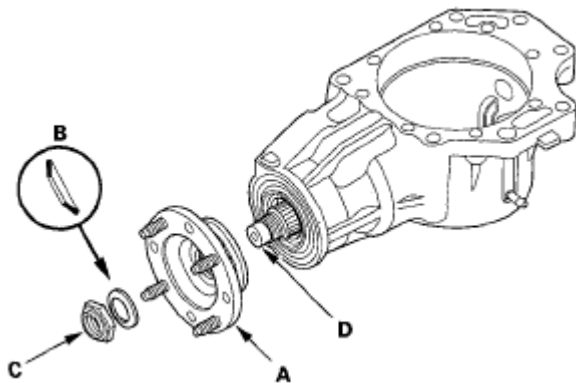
Identifying Companion Flange And Conical Spring Washer
